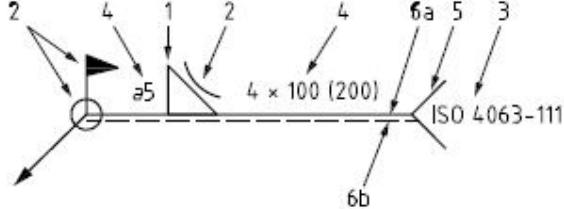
Example of a welding symbol based on required weld quality
